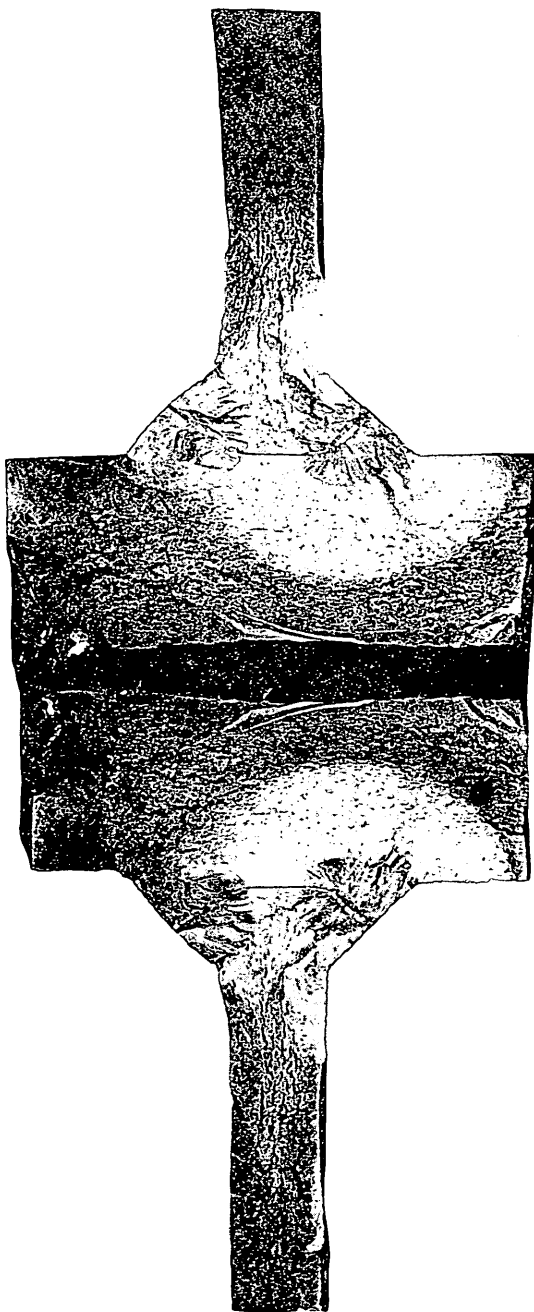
FRACTURE SURFACE - "TEE" SPECIMEN
